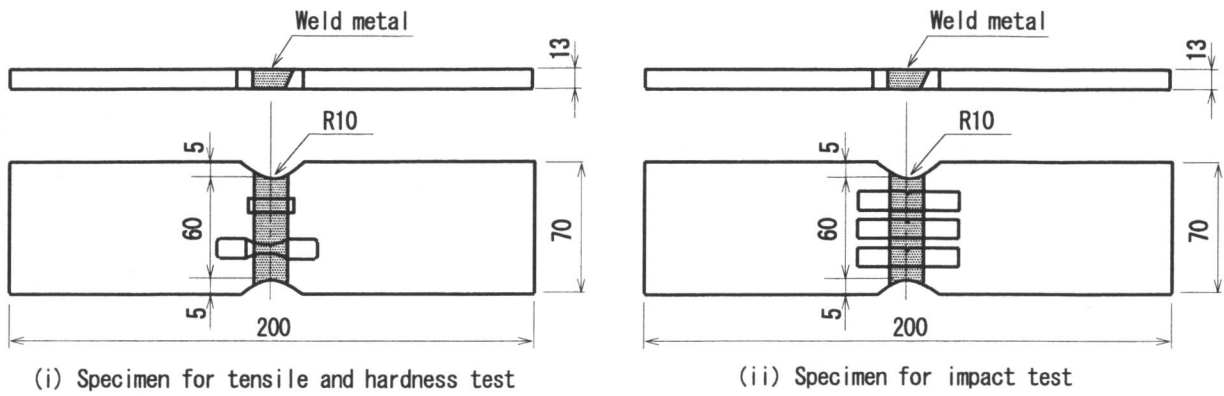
Specimen of weld metal for giving prestrain.
